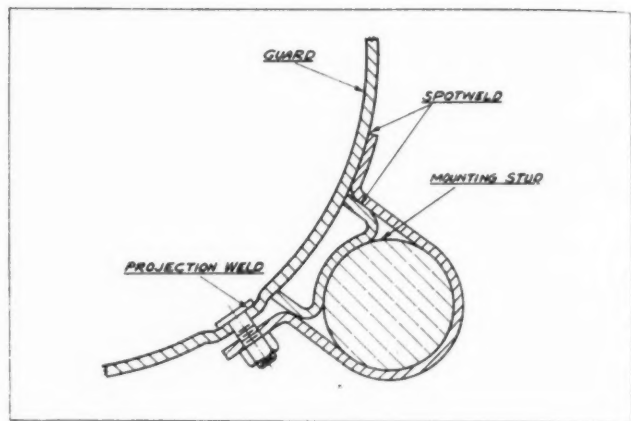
Cross-section View, Showing Method of Mounting Sheet-steel Guard
